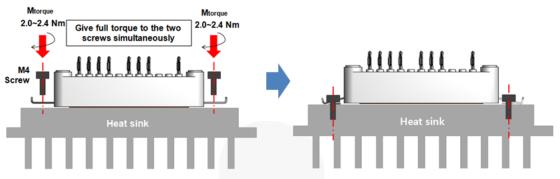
Illustration of Screw Clamping with Heat Sink (Method 1)
